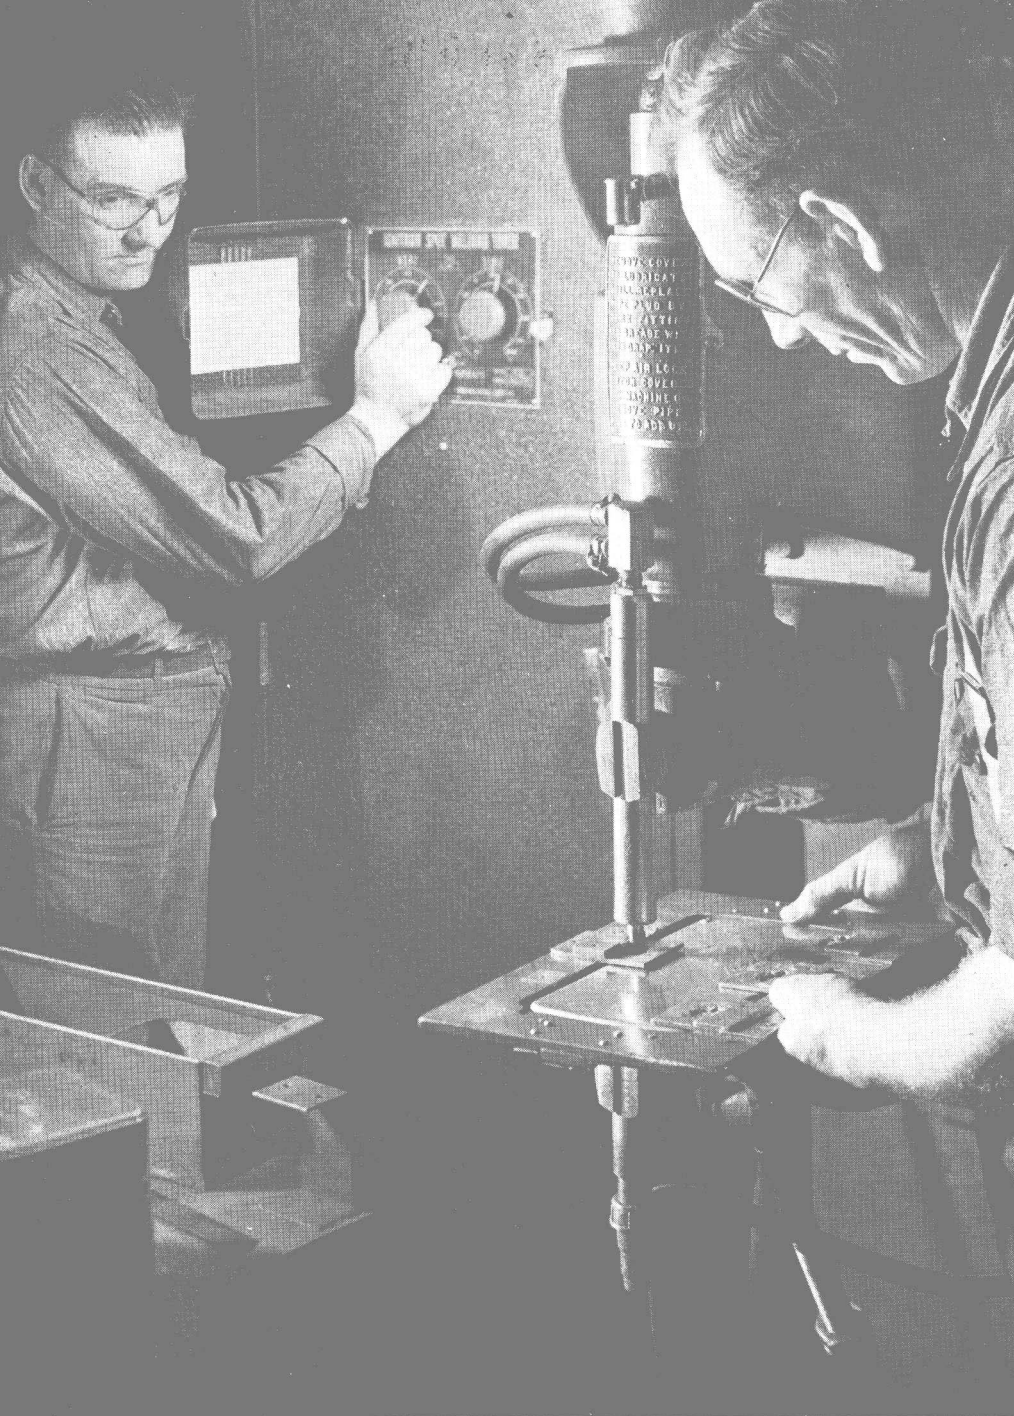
Ignitron (electronic) controls being set to measure off 8 cycles of 48,000-ampere welding current for spot welding two 0.062-inch thick aluminum parts. Control is easily adjusted to handle various thicknesses. Westinghouse Electric photo.
